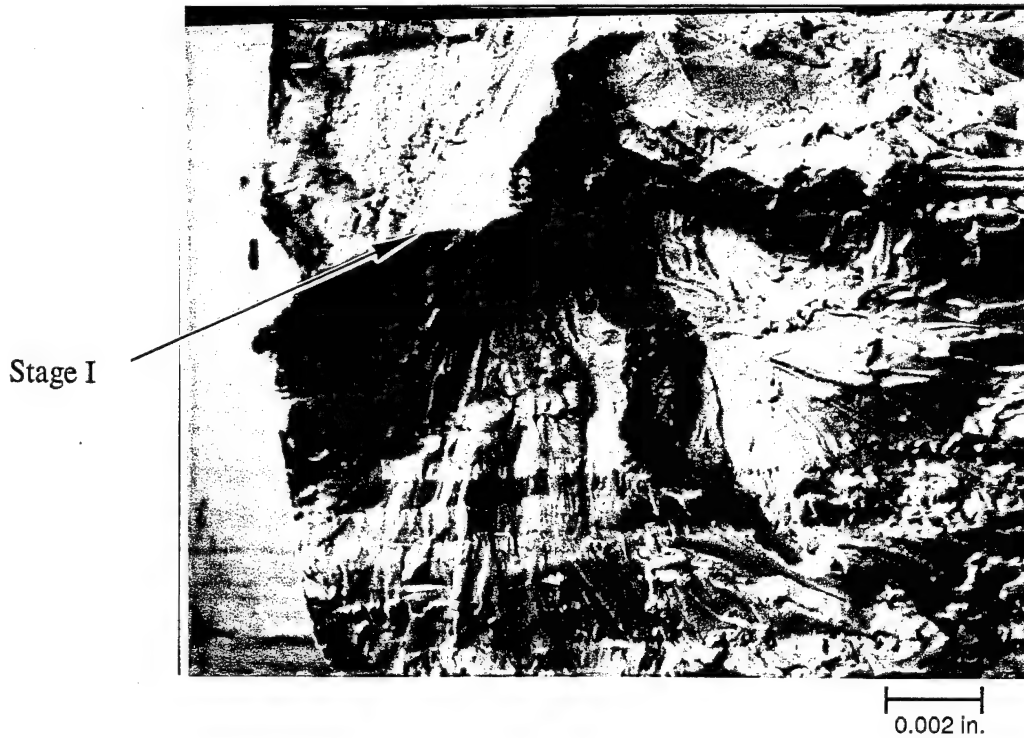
Fatigue crack initiation in open hole specimens showing stage I type initiation in the *thin material*.
